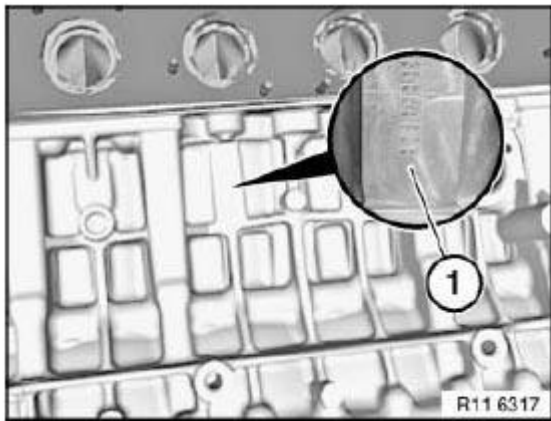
Identifying Bearing Classification Of Crankcase Upper Section
